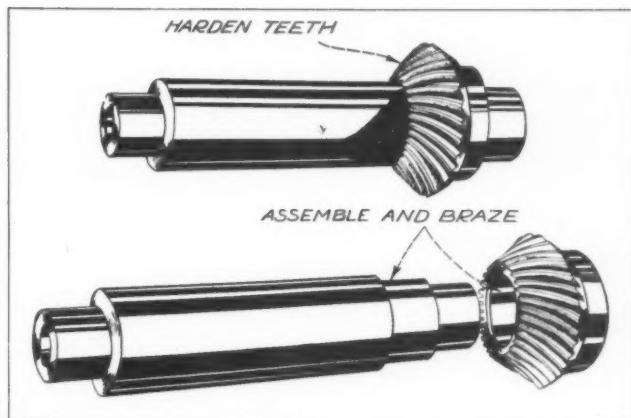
A Gear Assembly that is Conveniently Handled by the High-frequency Induction Heating Method
